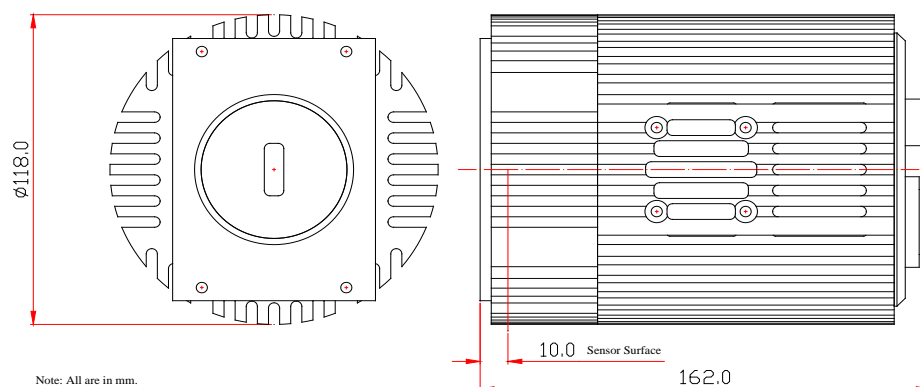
Profile (outline) drawing with outside dimensions of a typical camera
